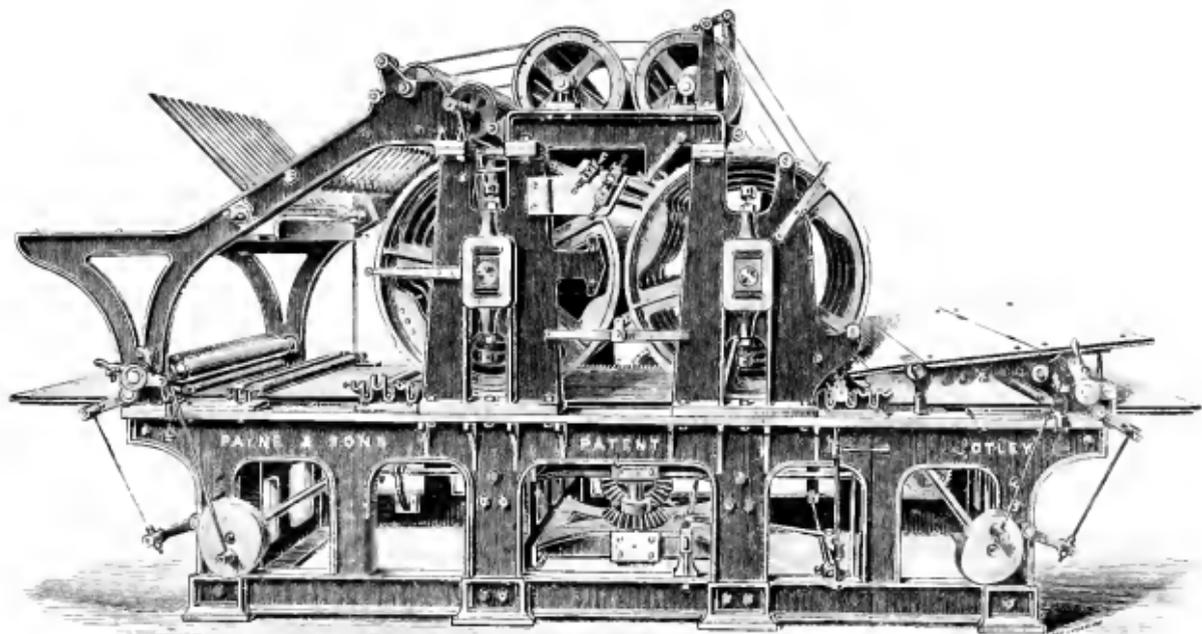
Payne's Large Cylinder Single Revolution Perfecting Machine.
